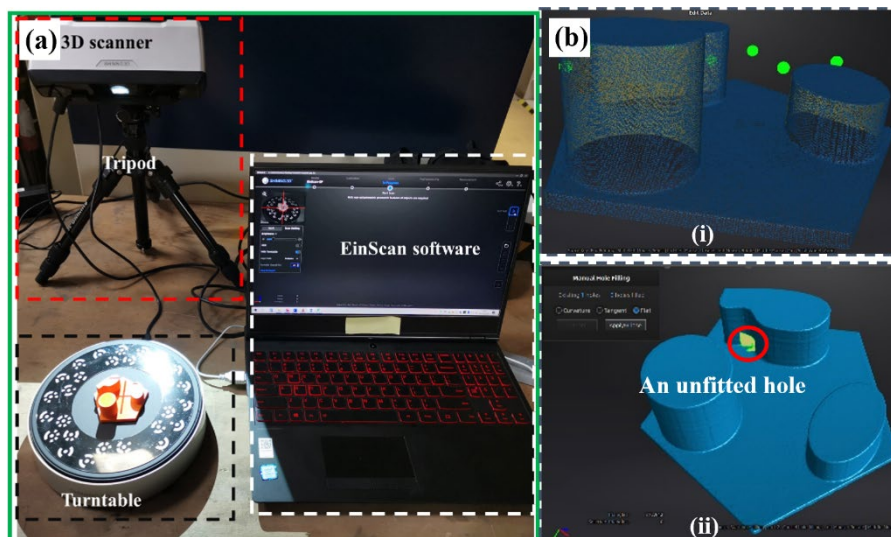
Acquisition of the digital model of the workpiece to be manufactured: (a) Desktop 3D scanner; (b) Digital model acquisition
